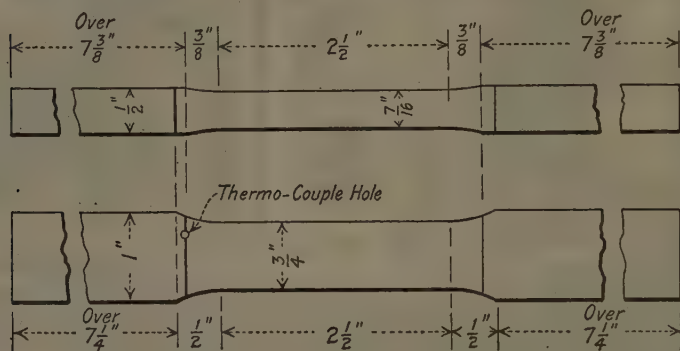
FORM AND DIMENSIONS OF TEST SPECIMEN USED BY FRENCH
